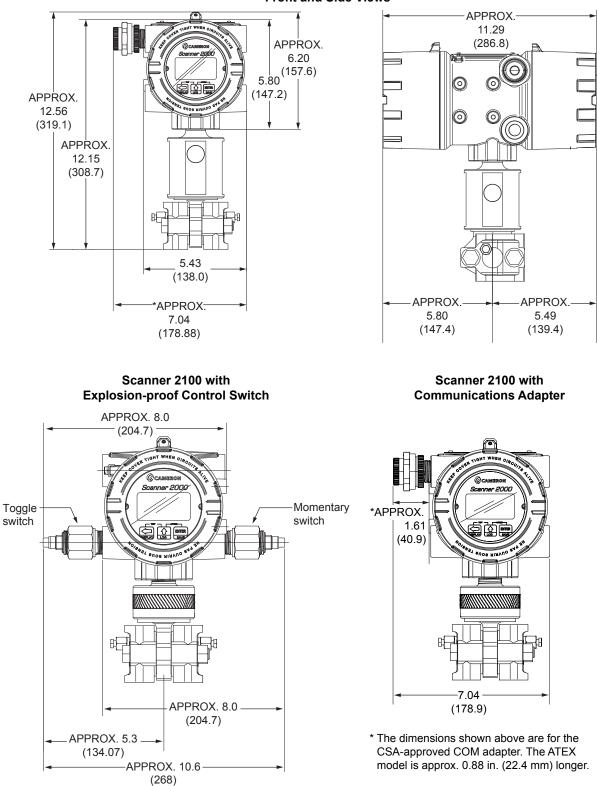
Scanner 2100 (wired) with direct-mount MVT; dimensions are shown in inches (mm)
